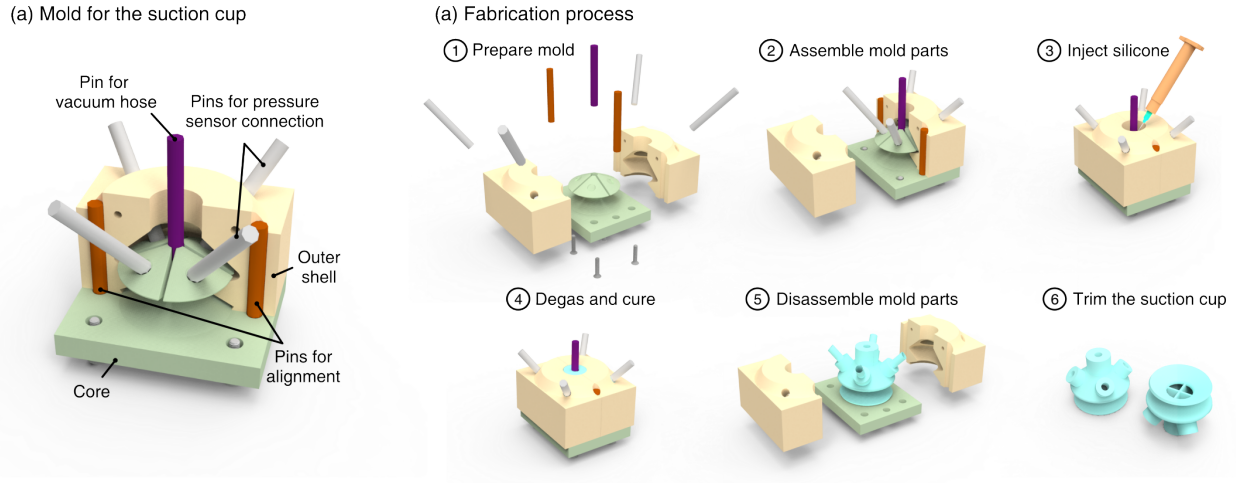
Casting mold and fabrication of the suction cup. (a) The casting mold has three parts (2 Outer shells and 1 core). Molds are aligned and fixed by pins and bottom bolts. (b) The fabrication process of the suction cup.
